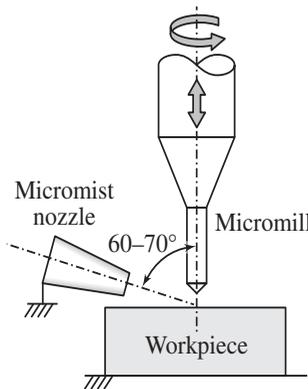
Positioning of a micromist nozzle in microdrilling. The nozzle and workpiece should be stationary.
